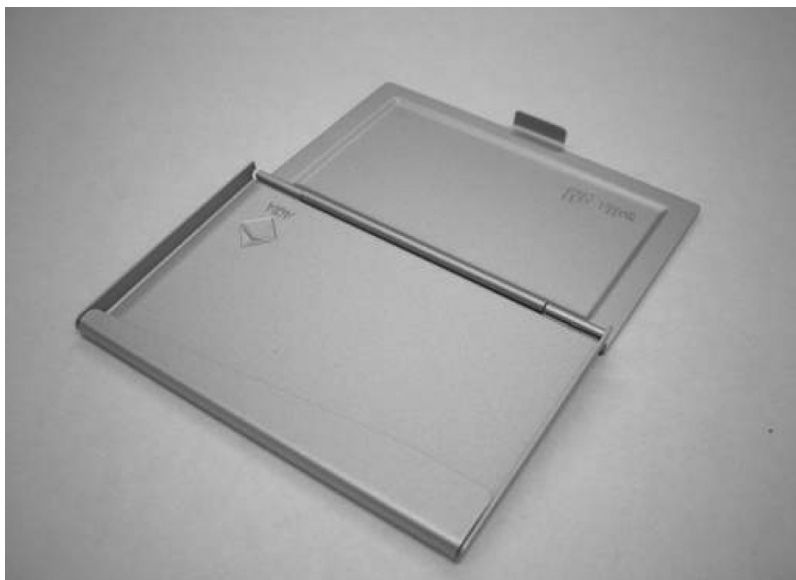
Business card holder made by using magnesium AZ31-O. Courtesy of Aida Engineering Ltd.
